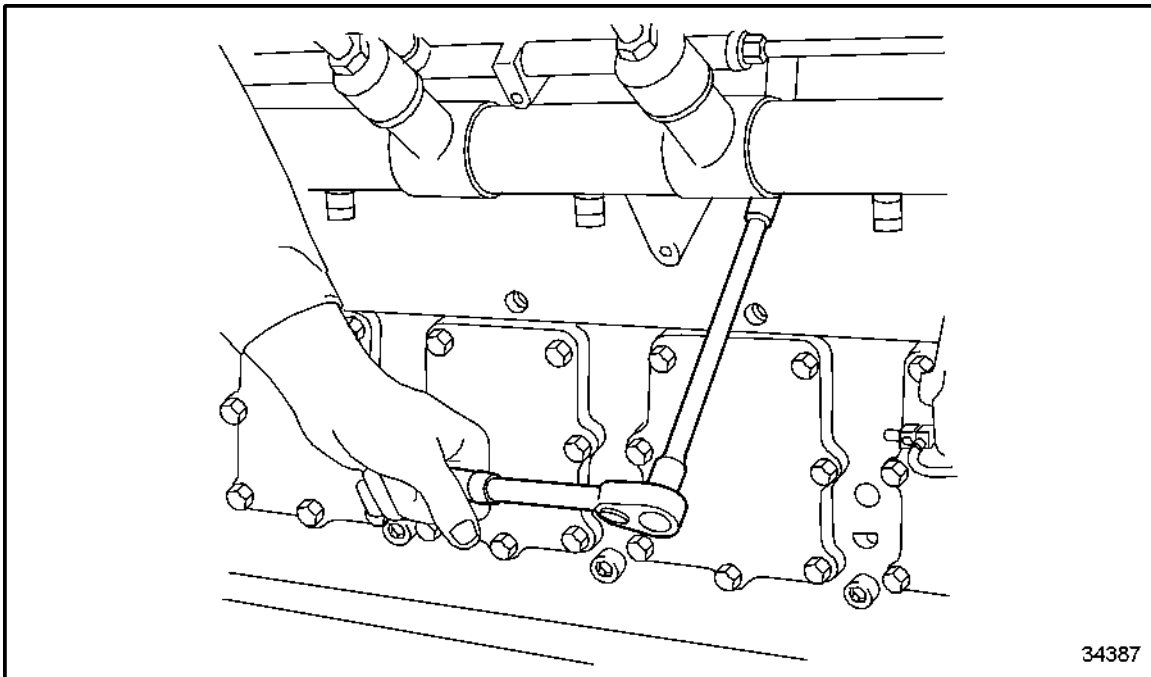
Removing High-pressure Rail Attaching Hex Bolts from Cylinder Block
